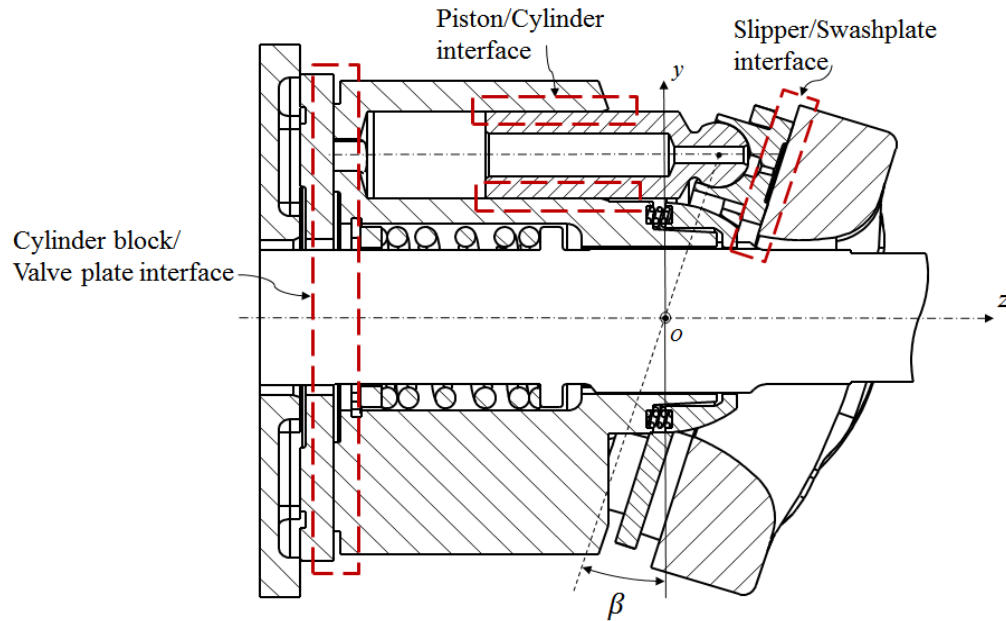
Axial Piston Machine Swash Plate Type Cross-section.
